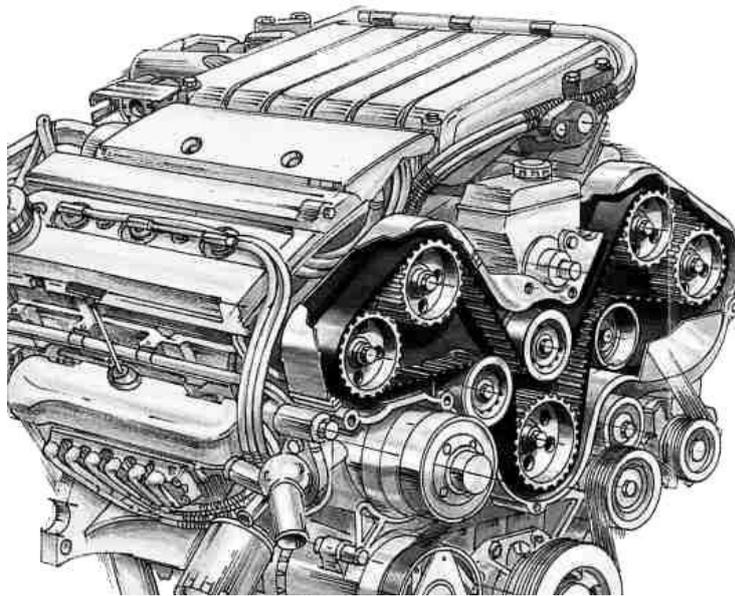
Ribbed belt as a timing belt for the camshafts of a car engine.
